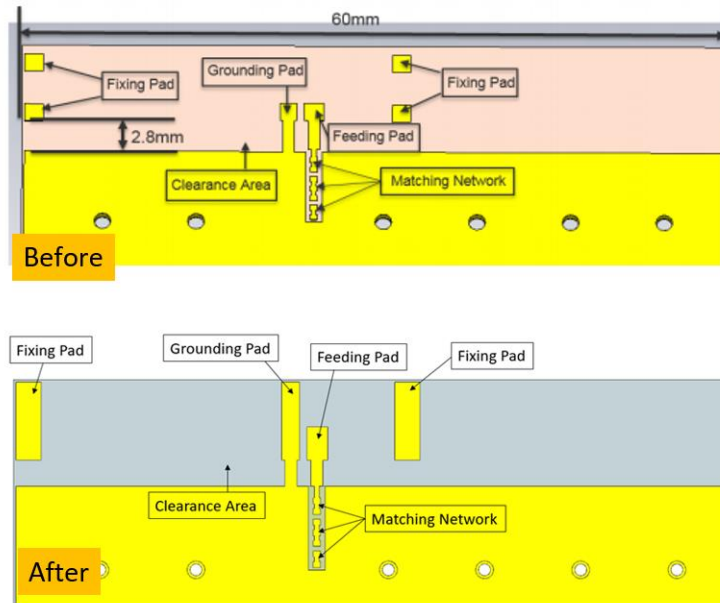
PADS OF PRODUCT FOR SOLDERING
